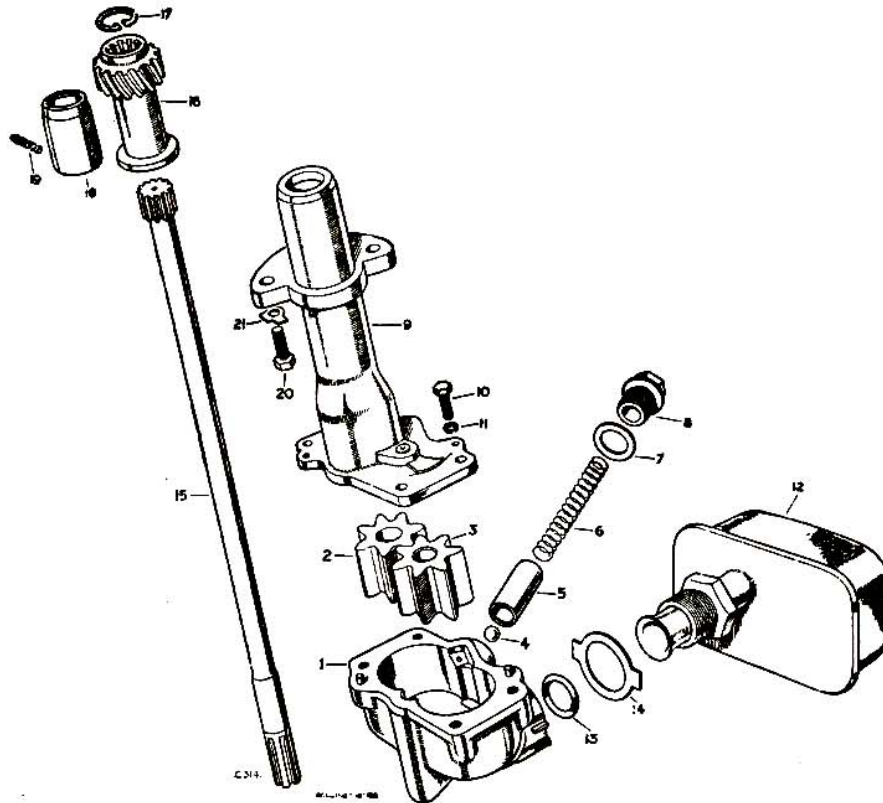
Exploded view of oil pump and driving gear, Diesel models.
